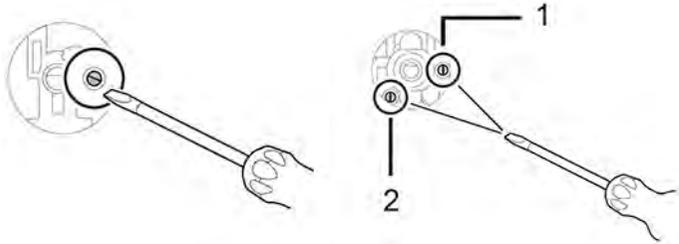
Adjusting bypass small / large and dual ring (1 - inner, 2 - outer) gas valves
